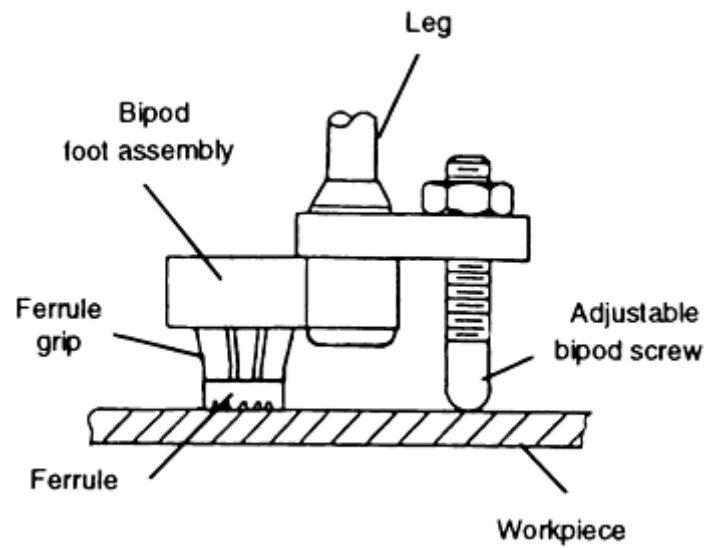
USE OF AN ADJUSTABLE BIPOD FOOT ASSEMBLY TO PROVIDE THREE-POINT CONTACT, ENSURING PERPENDICULARITY OF STUD TO WORKPIECE
